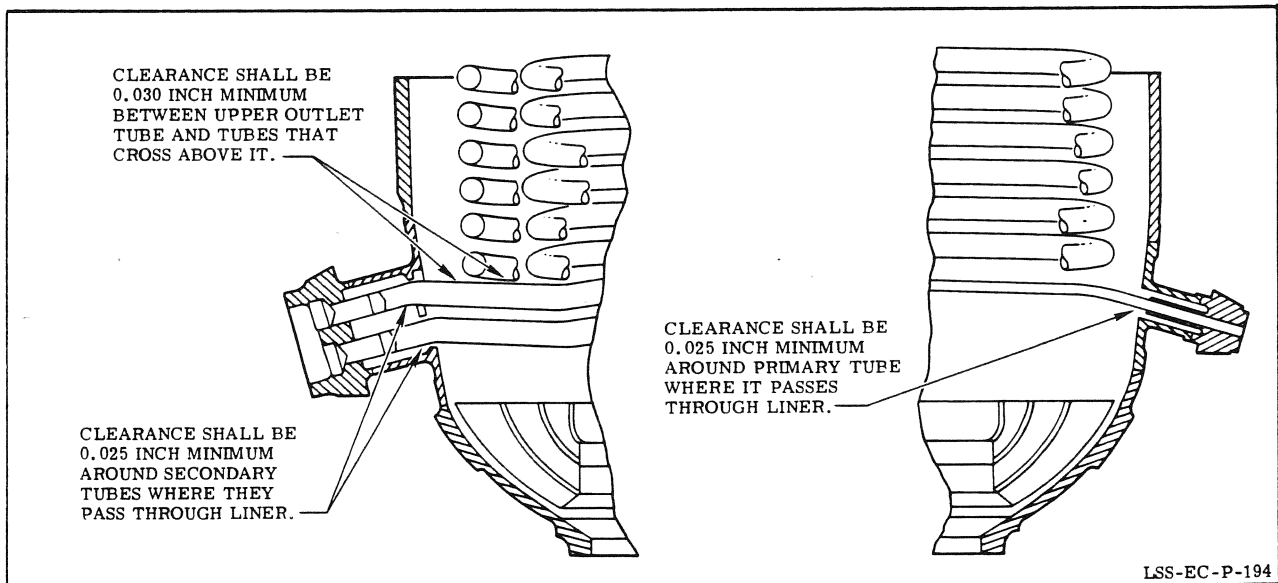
Primary Tube, Secondary Tube Clearance at Liner and Clearance of Tubes Crossing Over Outlet Tube
